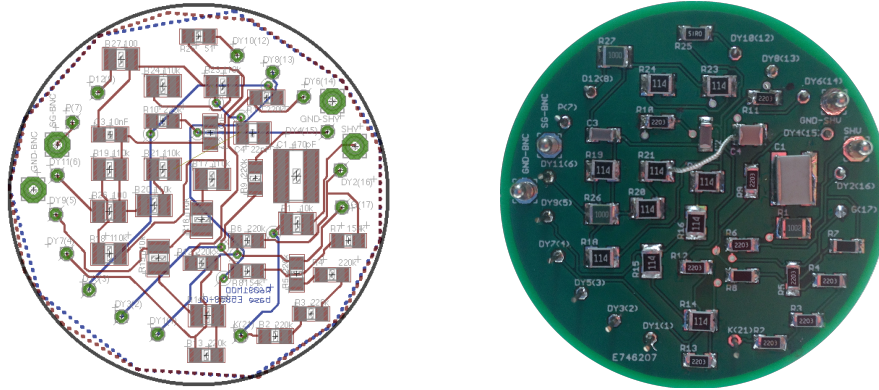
Left: PCB design using CadSoft EAGLE. Right: Real PCB, printed by Eurocircuit⁶, surface-mount component soldering performed by the author.
